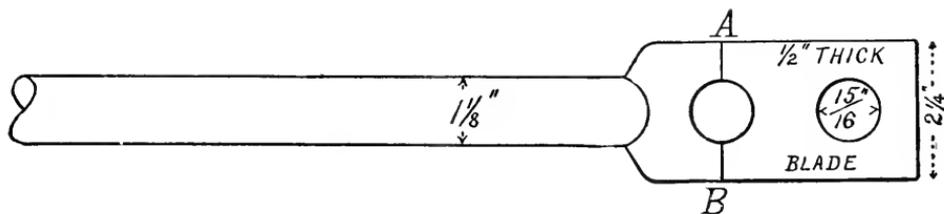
ILLUSTRATING WEAKNESS ACROSS RIVET HOLE.
